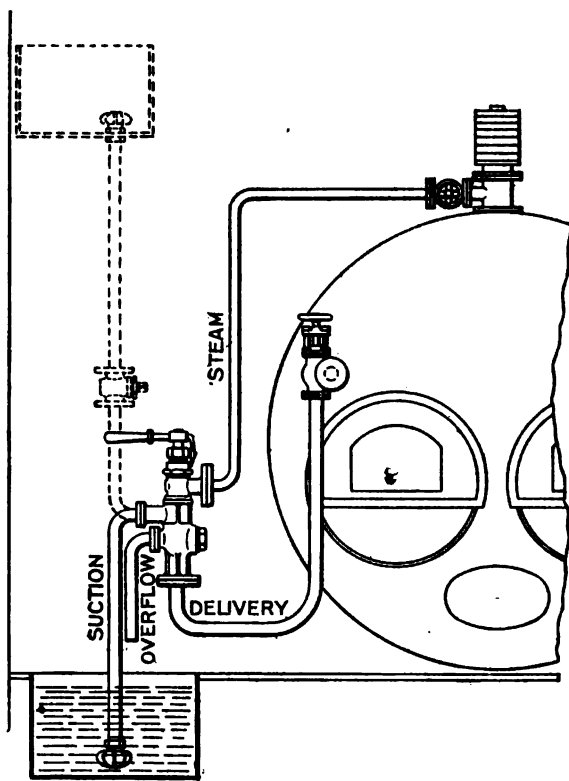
Arrangement of Messrs. Holden & Brookes' Injector for feeding a Lancashire Boiler; View in Front of Boiler.
